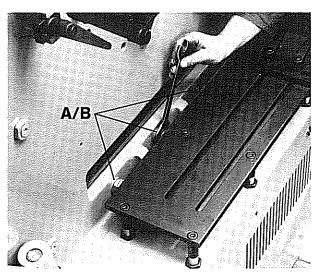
Changing the lower flat steel blade (KBLH 500, 700 and 1000)
